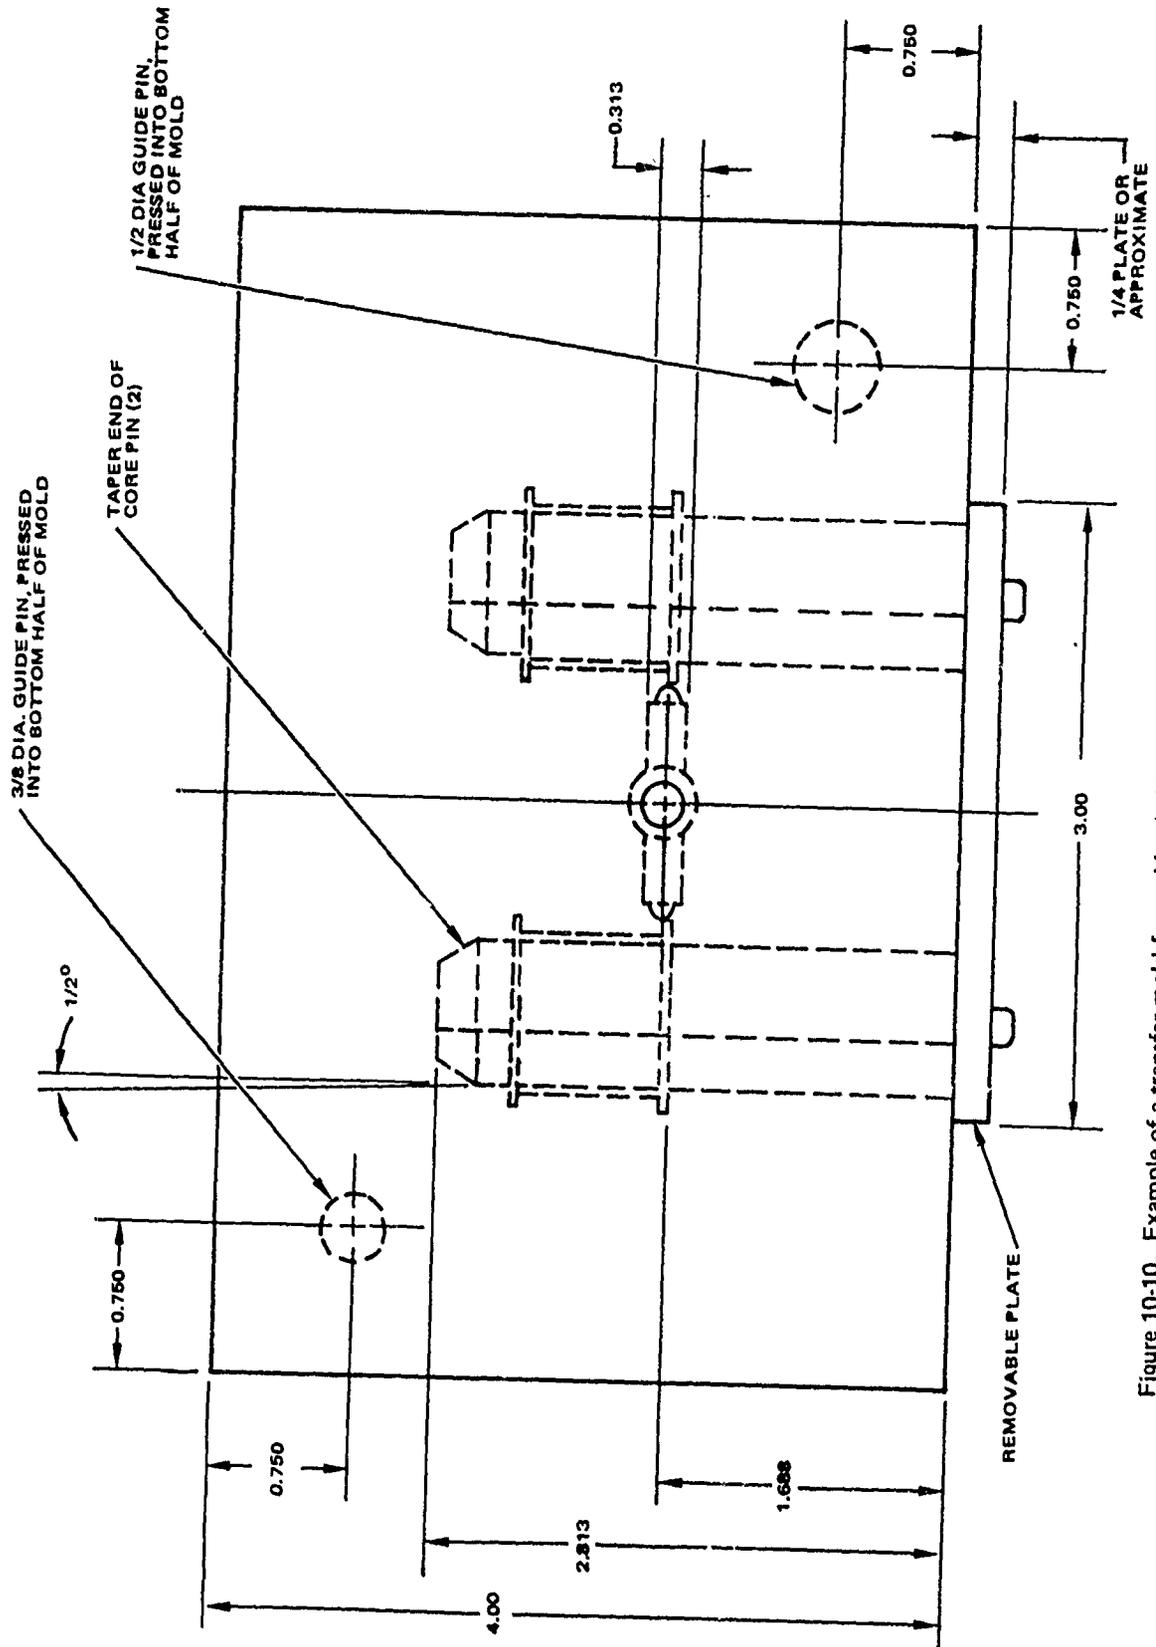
Example of a transfer mold for making bobbins (dimensions are in inches) (sheet 1 of 2).
